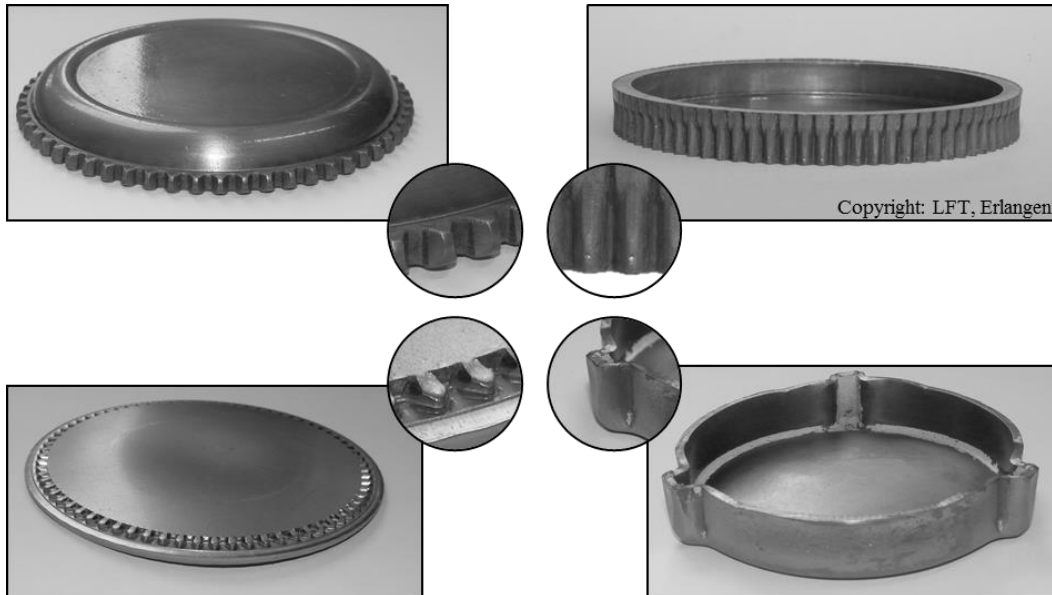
Samples of typical SBMF parts from test productions with different SDF. The diameter is about 80mm, the sheet thickness is 2mm and the material DC04 (1.0338).
